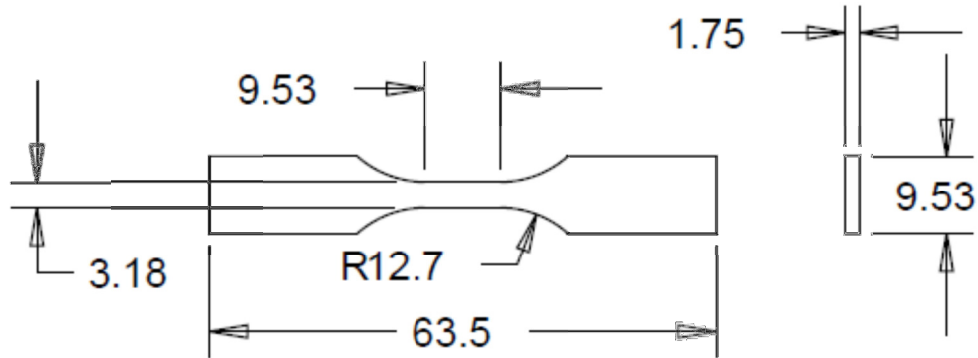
Dimensions of type V tensile specimens (units: mm) [84]
